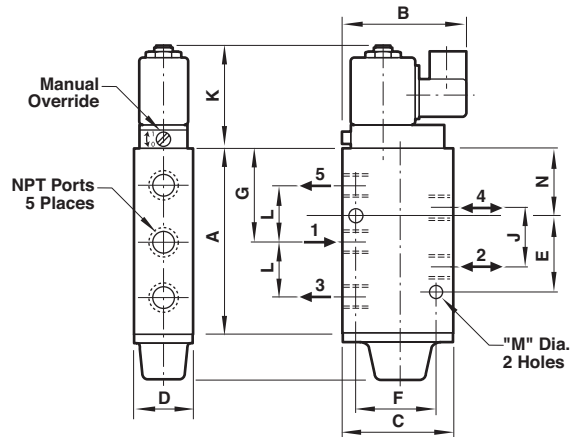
3/8" - 1/2" valve 2 position double solenoid
